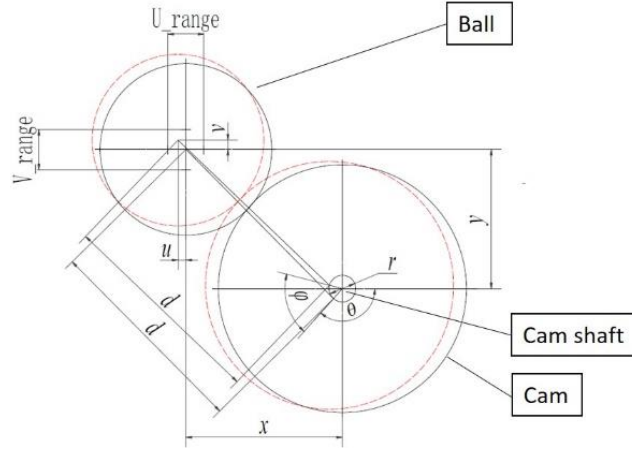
The diagrammatic drawing of one ball-cam mechanism
